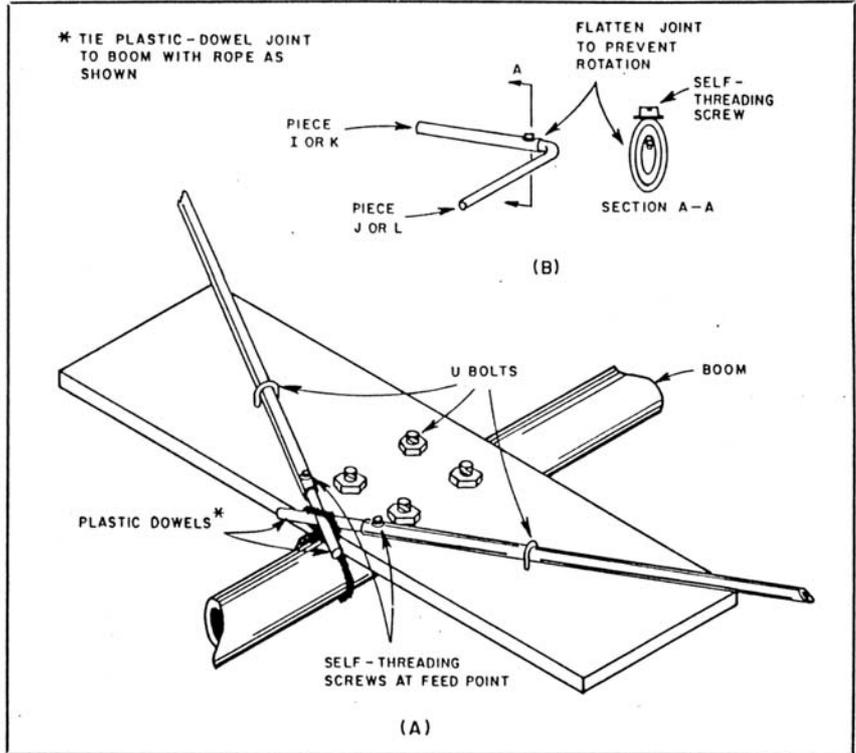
Details of the mounting-plate assembly (A) and element joint (B). Flatten the joint slightly after assembly to prevent rotation.
